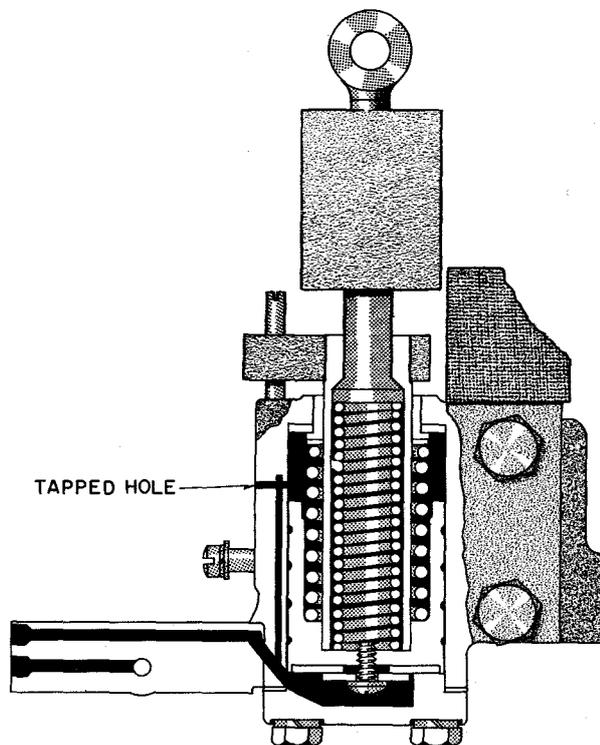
Location Of Tapped Hole Type 372 Contactor Air Cylinder
